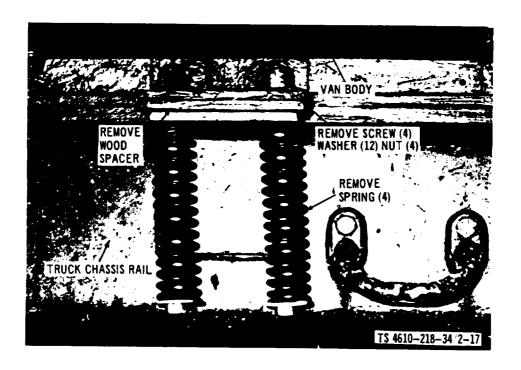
Van Body Mounting, Front, Removal and Installation
